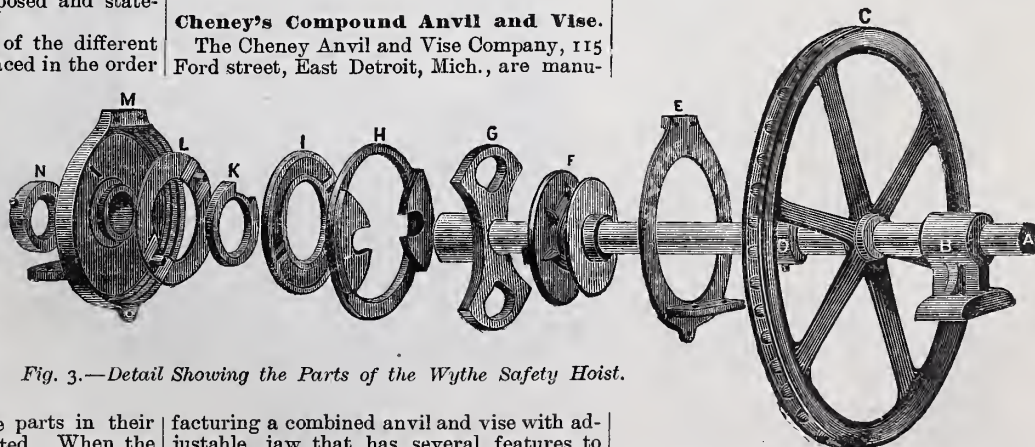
Detail Showing the Parts of the Wythe Safety Hoist.
